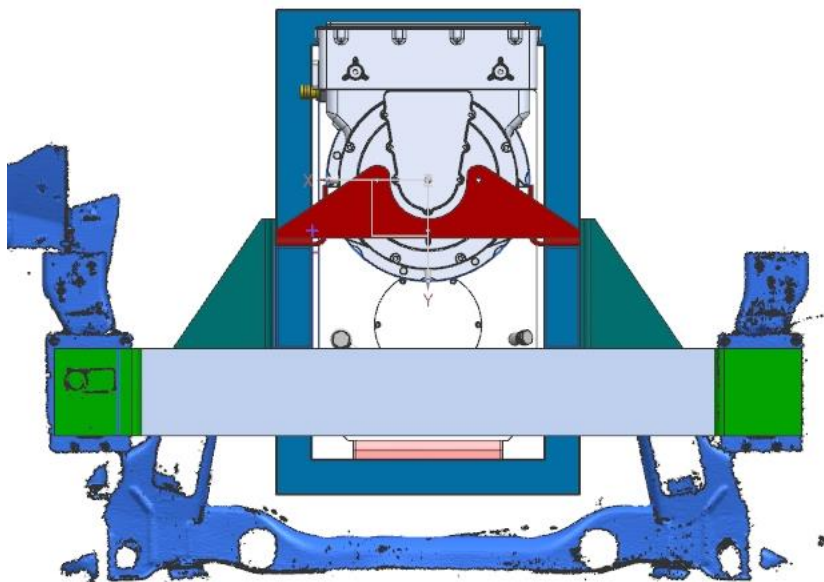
3D view of the motor and inverter with the gearbox connecting flange marked in blue
